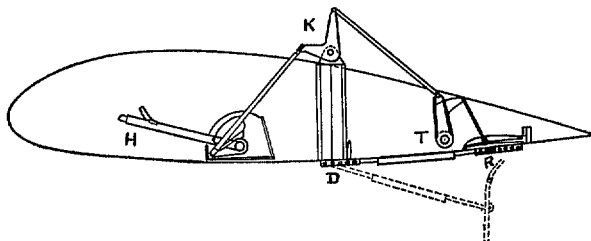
A Diagrammatic Layout, showing Position of Handle and Linkage to the Irving Flap.
